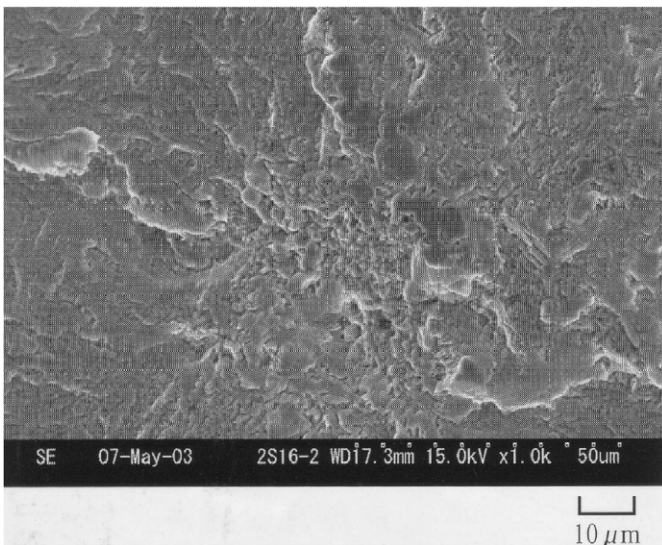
Fracture surface of titanium alloy. The fracture mode is interior, but there are no nonmetallic inclusions.
